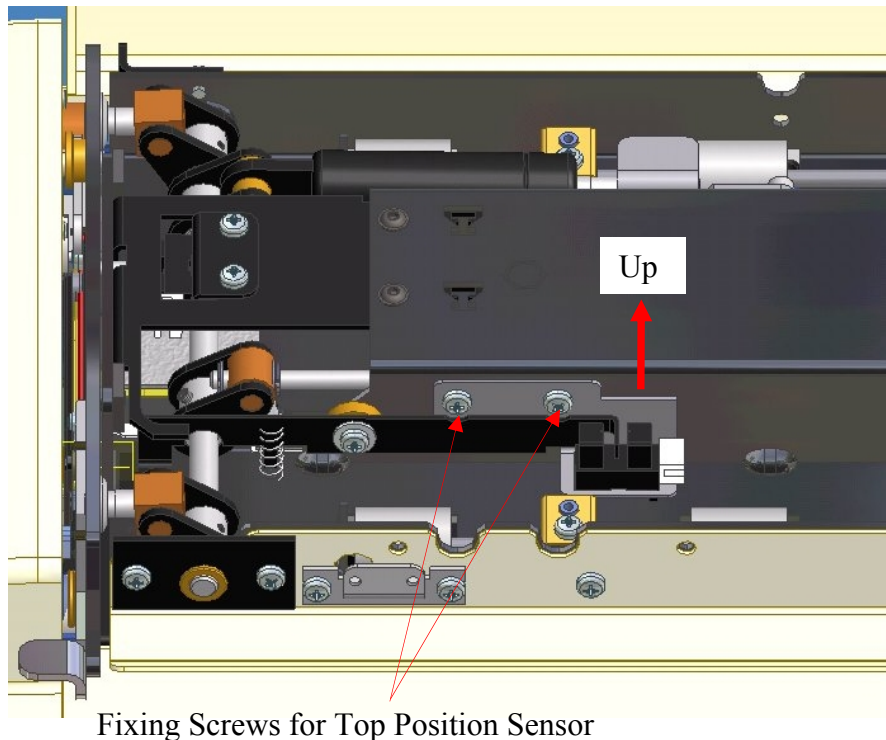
, Adjustment of Top Position Sensor (Type 1)
